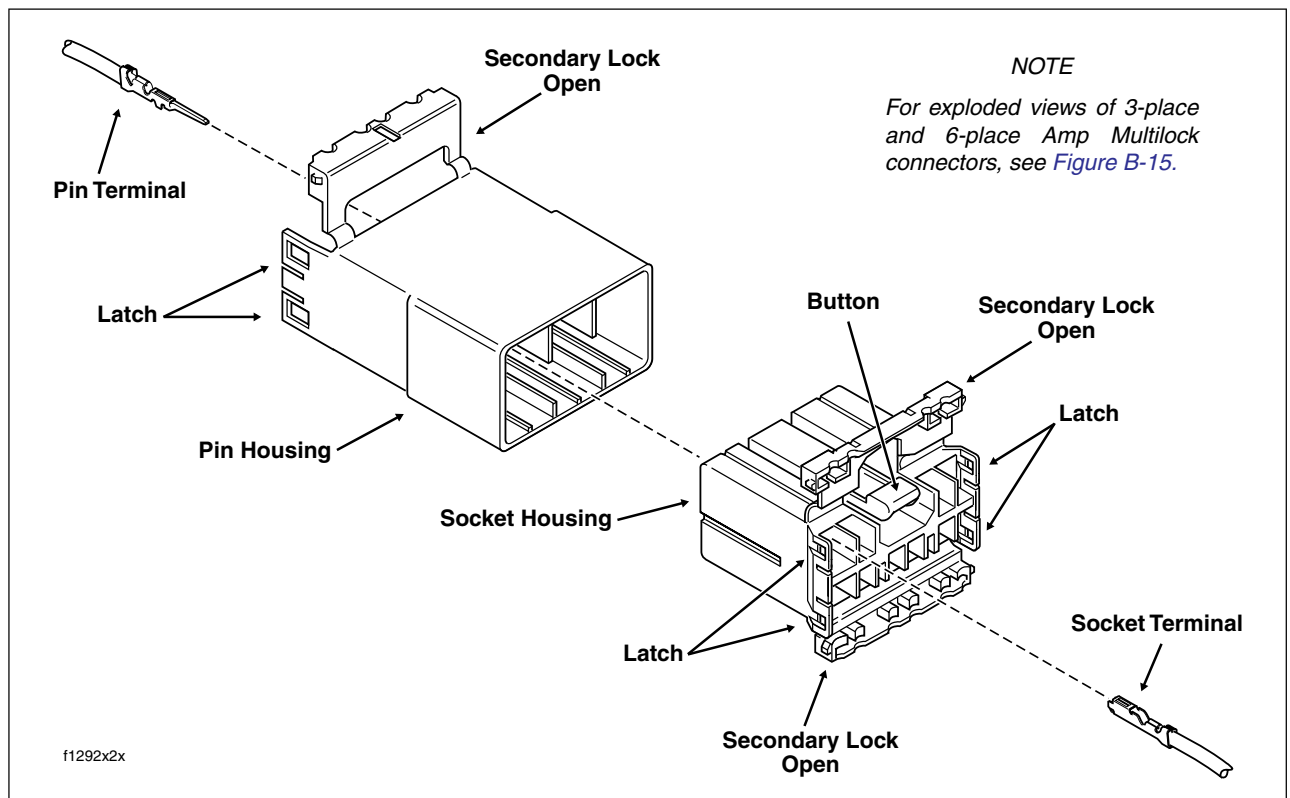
10-Place Amp Multilock Connector (Exploded View)
